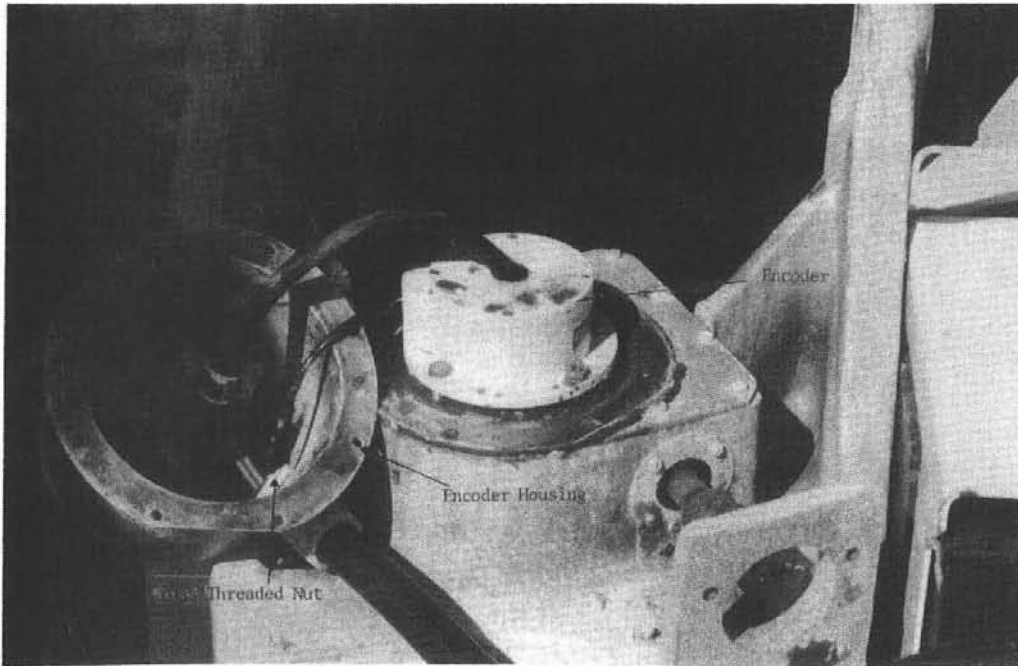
MDAC Drive with Encoder Housing Removed
